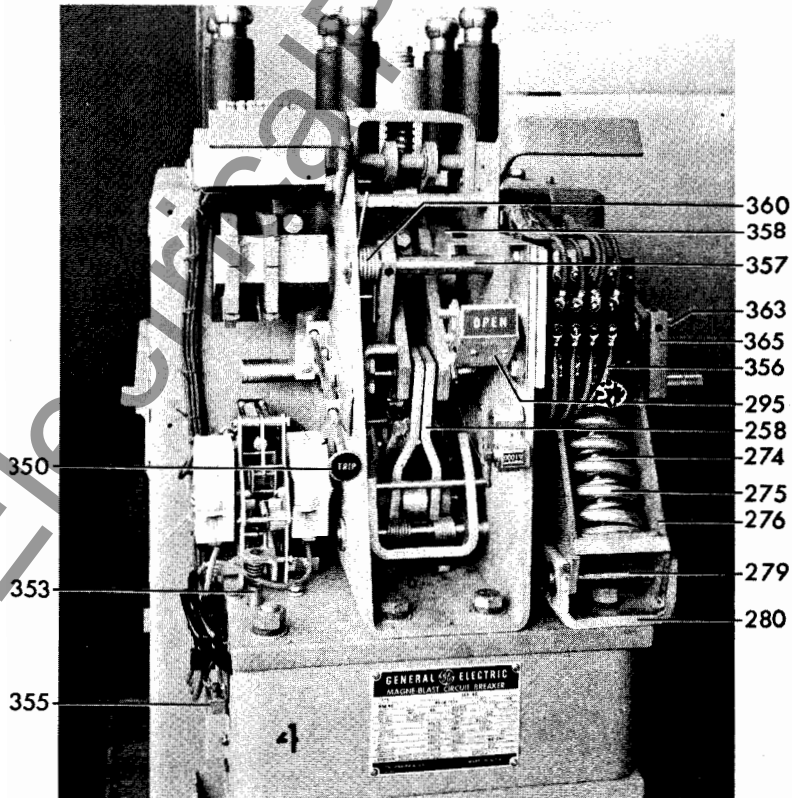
B MS-13 Mechanism - Front View (-4S Breaker)
